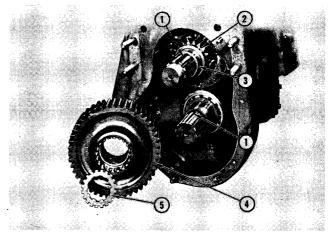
COUNTERSHAFT OVERDRIVE GEAR, REMOVED 1. Keyway Countershaft Mainshaft Overdrive Gear Overdrive Gear 3. Bearing Sleeve 5. Thrust Washer
